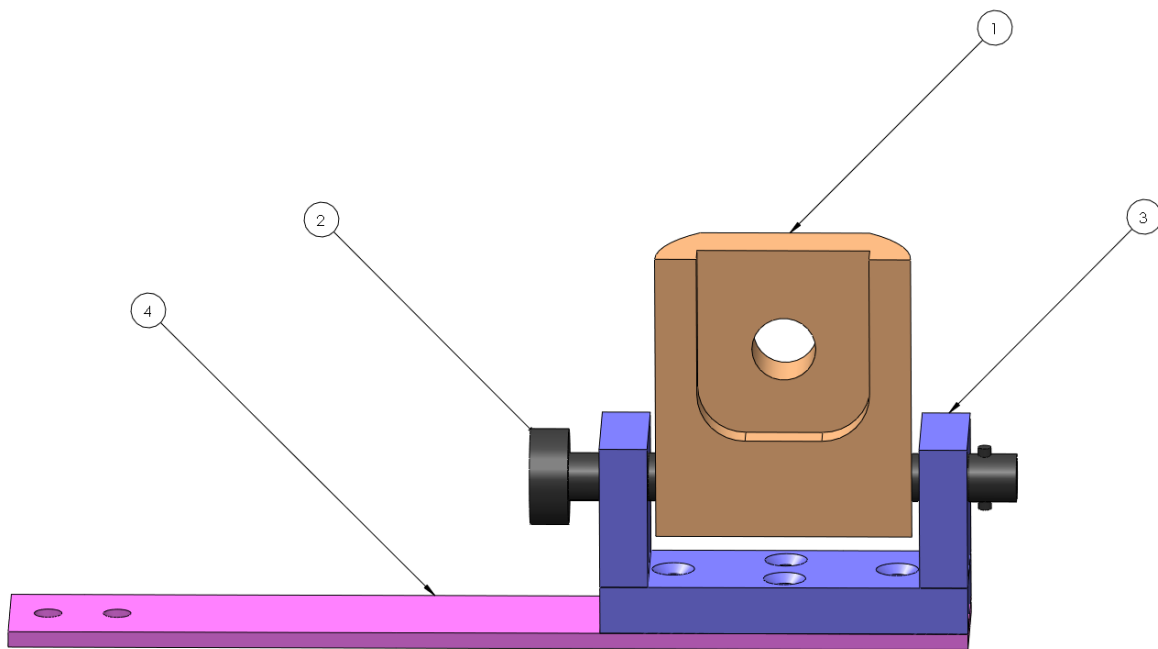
The ankle joint assembly. A 0.50-inch bolt holds the spring deflection joint (1) to the lower fiberglass bow spring. The deflection joint pivots around the linch pin (2), which is held in place by the ankle joint assembly (3). The spring steel platform (4) is inserted into the sole of the bike shoe and fastened into the cleat with two M6 screws.
